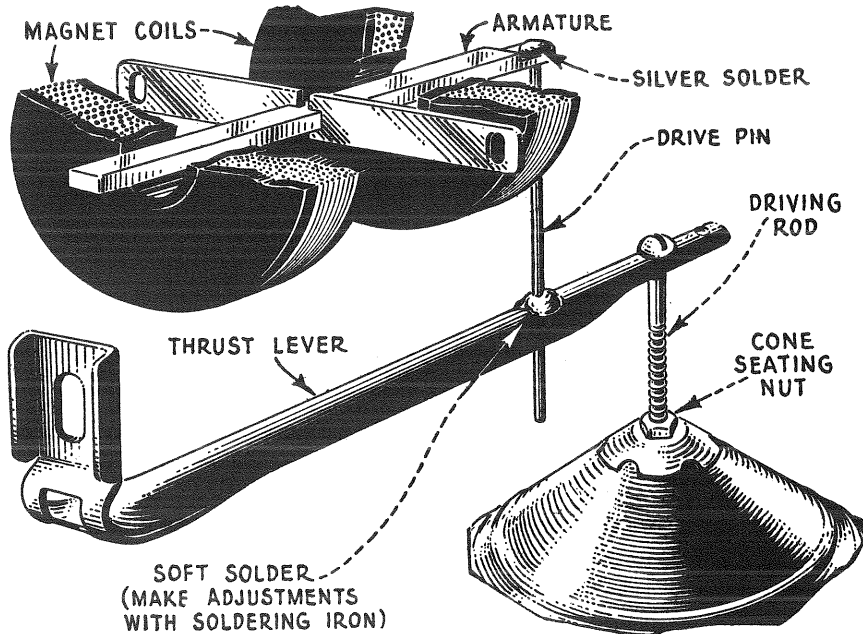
Constructional details and operating principle of the motor mechanism—Note cone seating nut
